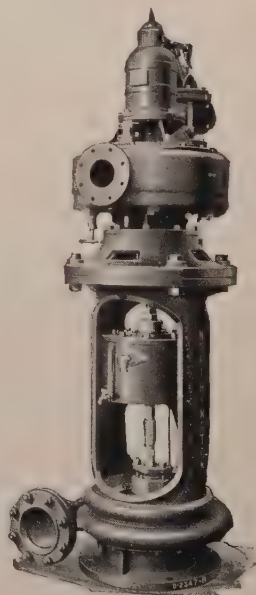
Worthington AXIFLO driving head and Booster Pump with steam-turbine drive.
